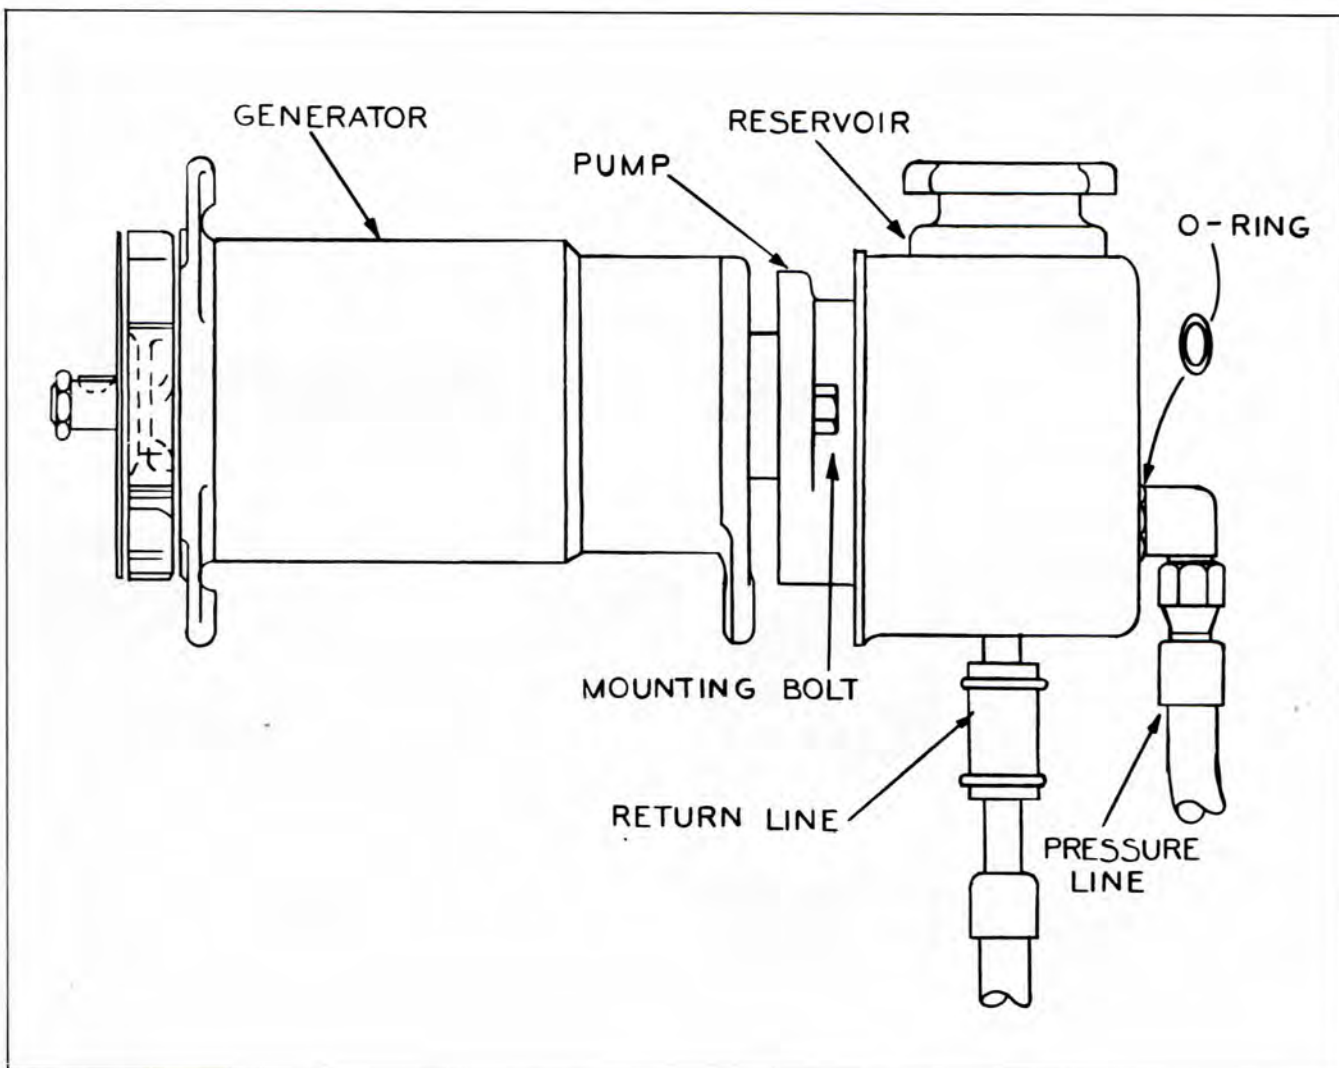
Typical Power Steering Pump (Machines so Equipped)
